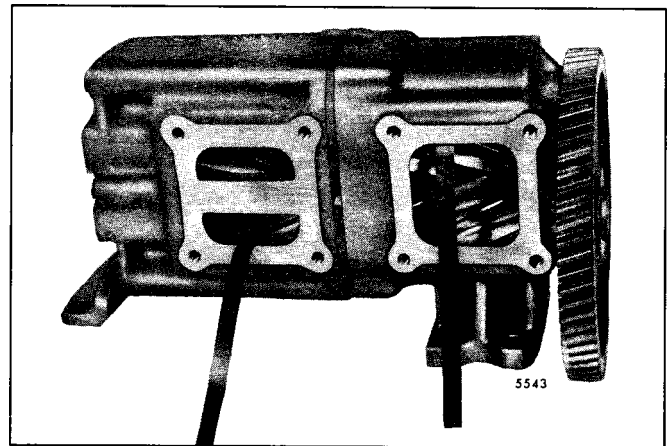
Checking Minimum Clearance Between Oil Pump Gear and Body
